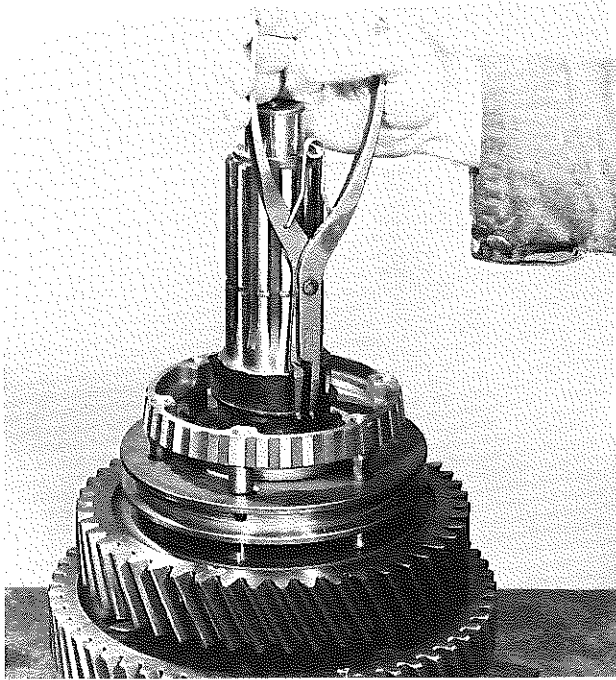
Removing 2nd-3rd Speed Clutch Gear Snap Ring
